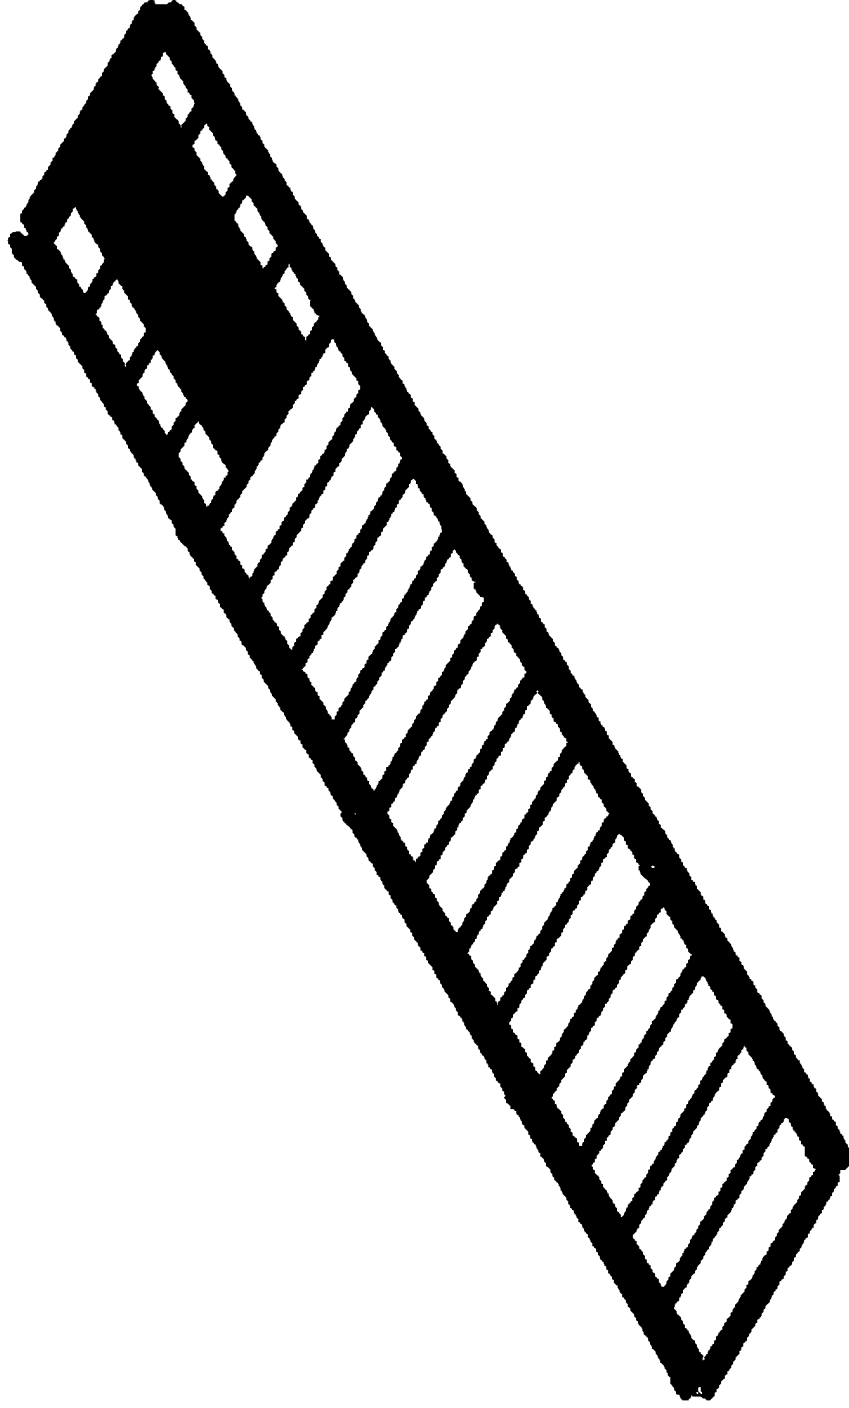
A: Opaque isometric view of the floor frame (40 foot collapsible cargo container)
